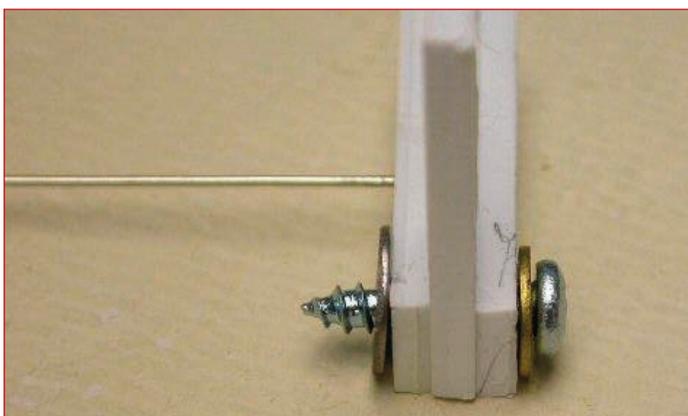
A small metal washer between the crank and the underside of the layout and another small washer between the screw head and the crank provide bearing surfaces and clearance.
